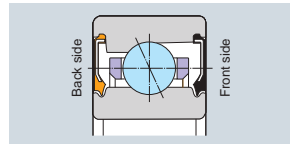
Standard grease-lubricated sealed angular contact ball bearings
